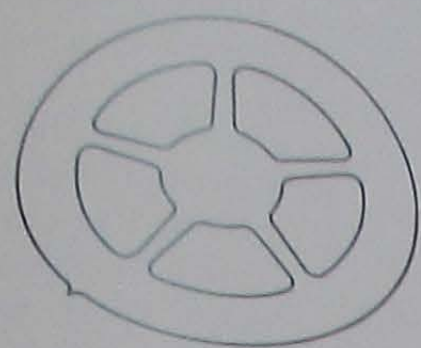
shows a typical blank. Clean both sides of the blank with water-of-Ayr stone to remove the cutter burrs, and the blank is ready for dividing.
